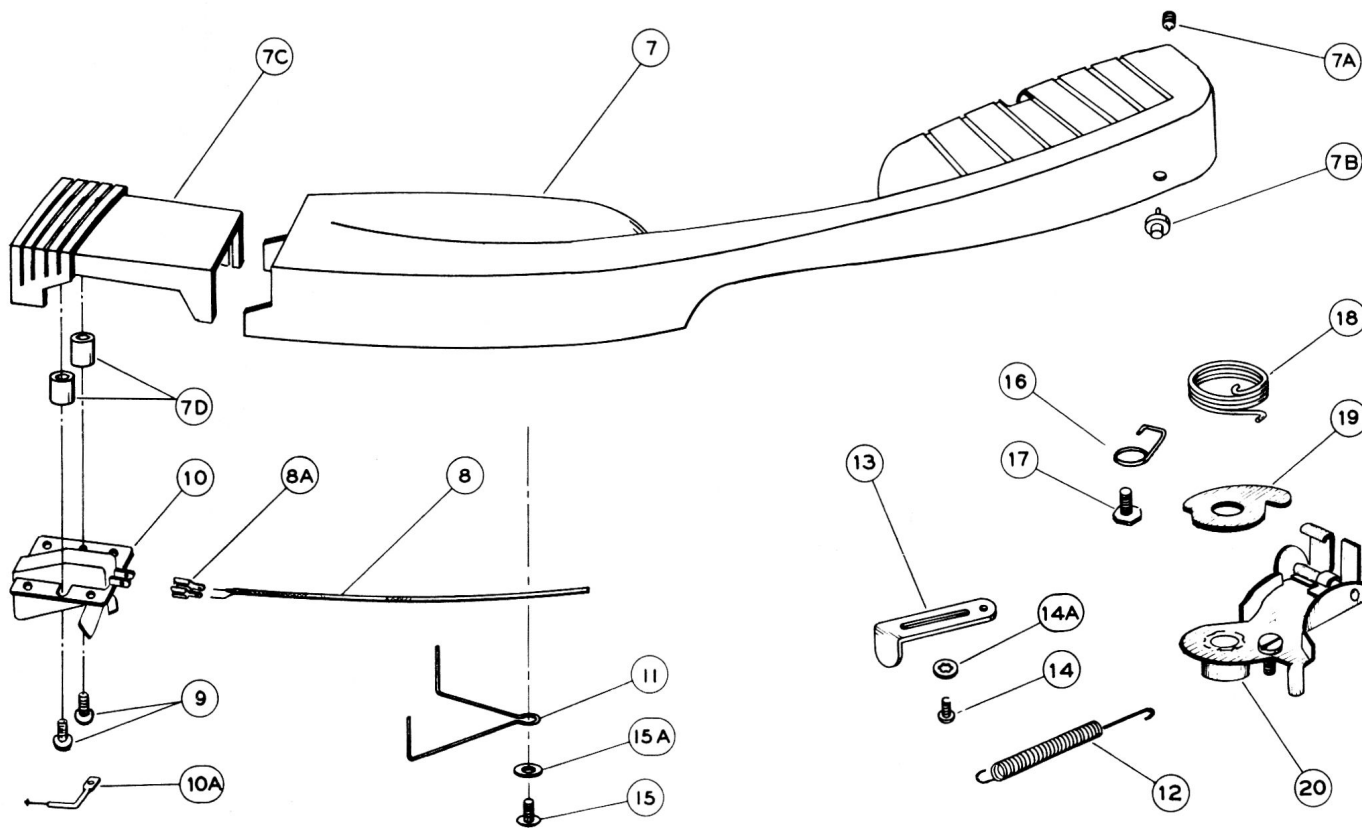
Pickup Arm Assembly for 930800-4 and -5
